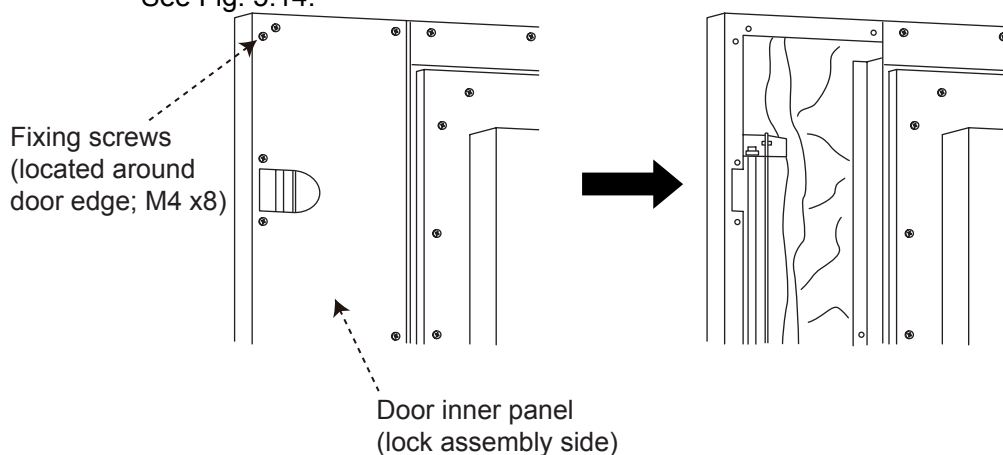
Door inner panel (lock mechanism side) and related parts
